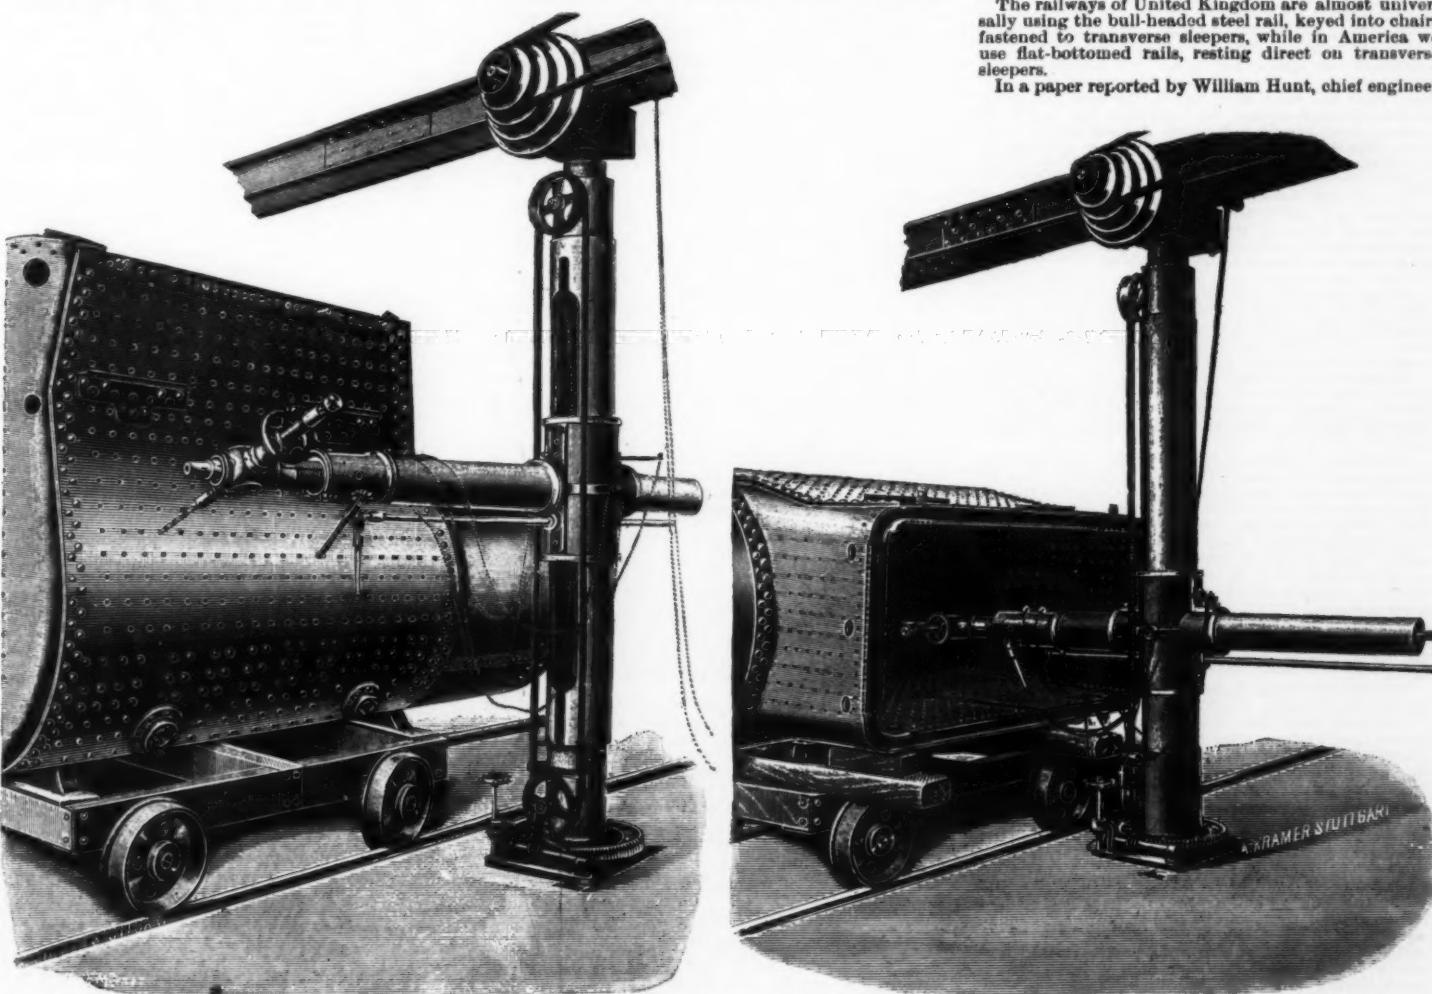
MACHINE DRILLING A LOCOMOTIVE-BOILER.
